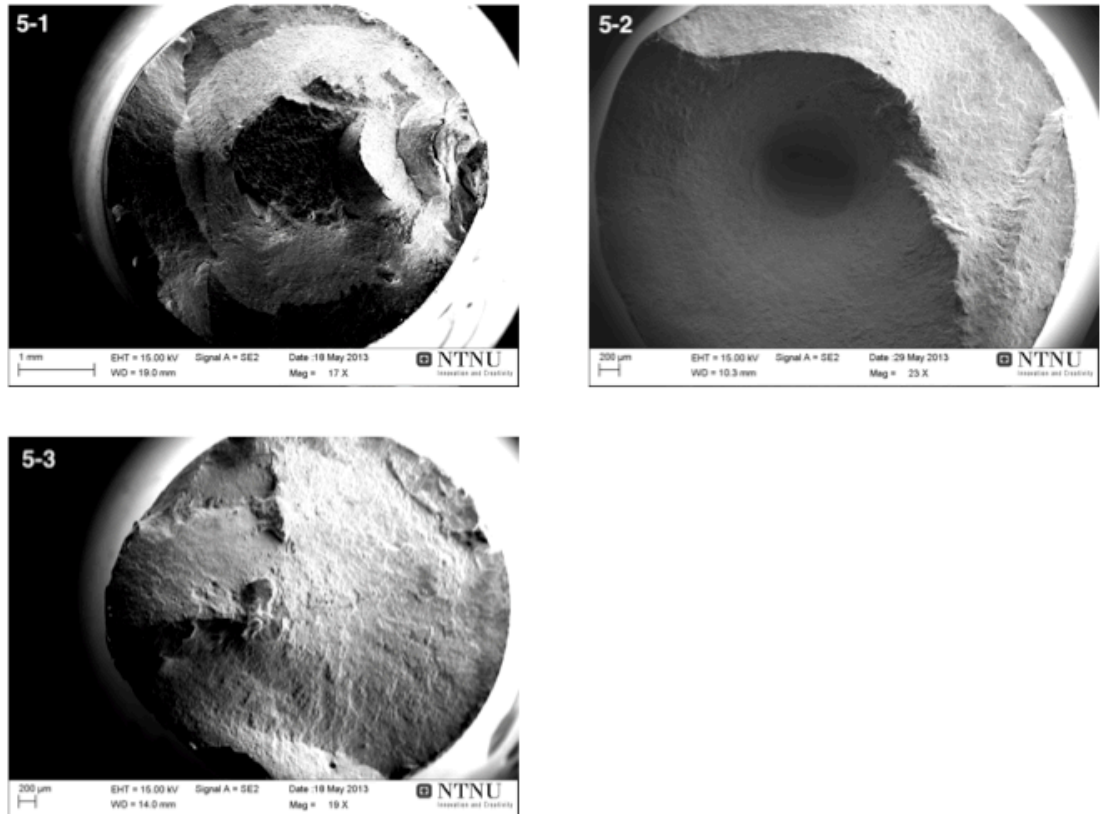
Fractographs of the fracture surfaces of the Al-5wt% AZ31 tensile test parallel.
